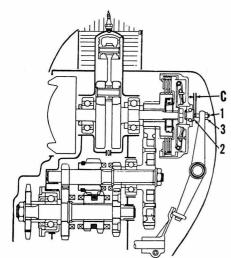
Cross sectional view gine and automatic clutch for HM/S models. Clearance (C) should be 0.040-0.063 in.
